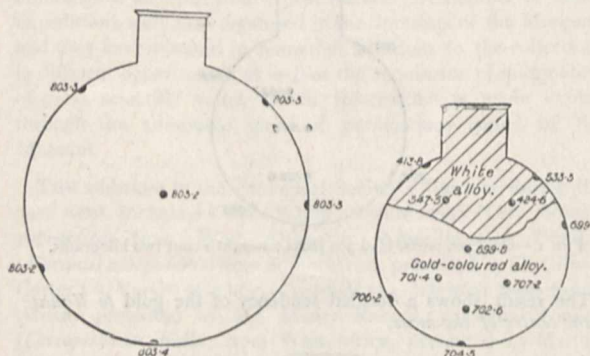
Gold 77'5 parts, silver 7'5 parts, zinc 15 parts; weight 3'930 kilograms.
